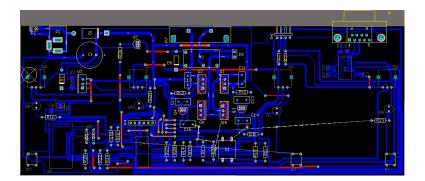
Crowed route around microprocessor on first version PCB layout of Terina. Red wired is where the jumper used.
